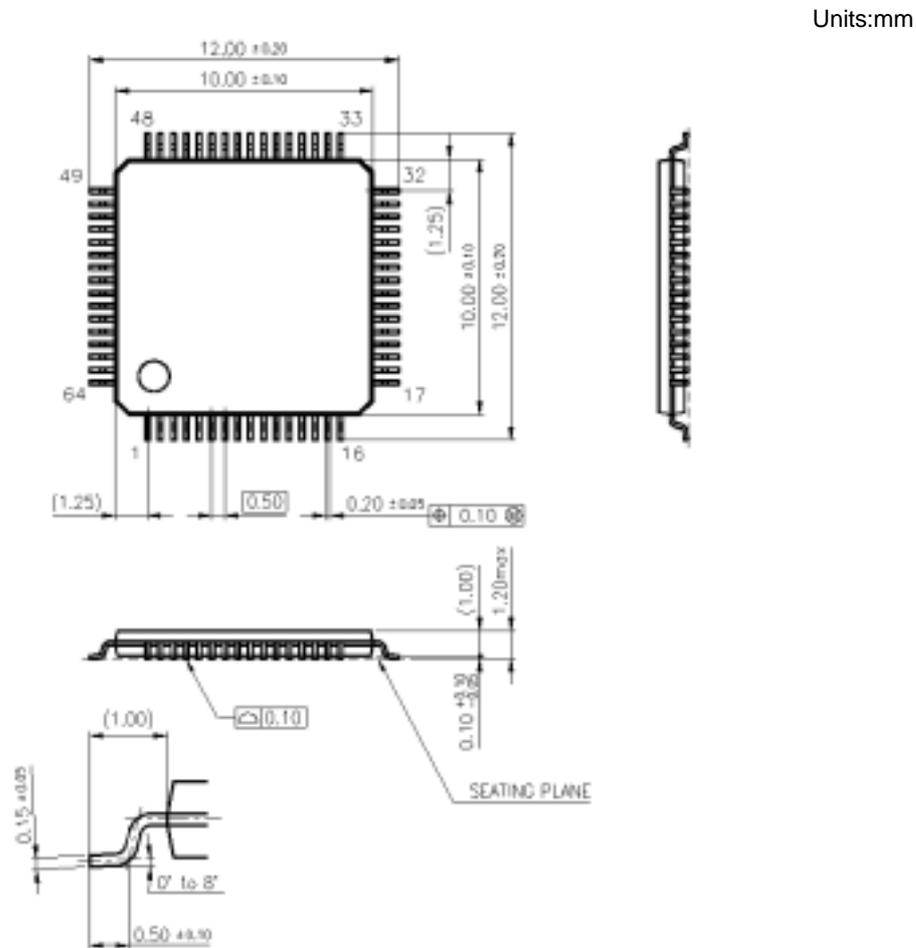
Package Dimension of TQFP064-P-1010D
